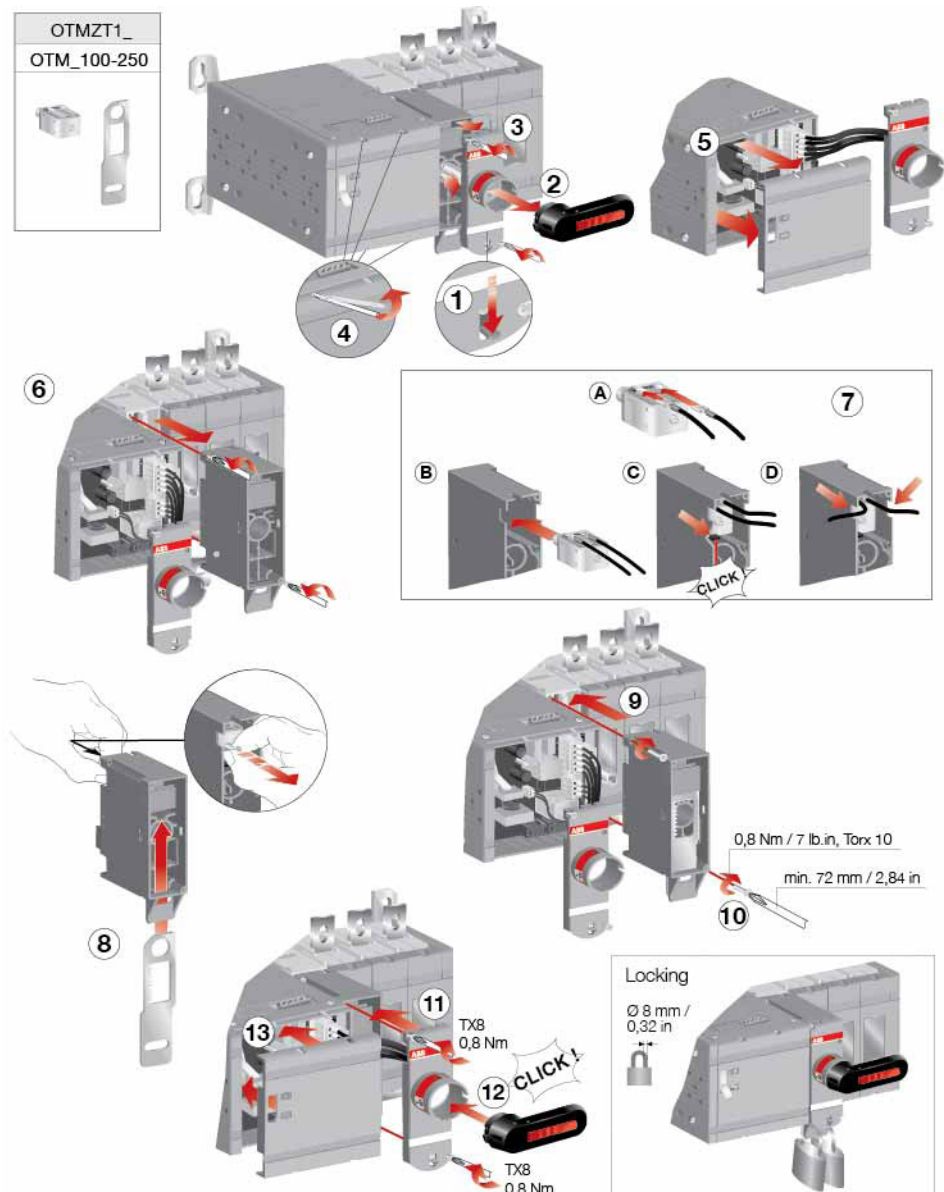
Mounting the accessory OTMZT1_ to the motorized switch-disconnector OTM_100-250
